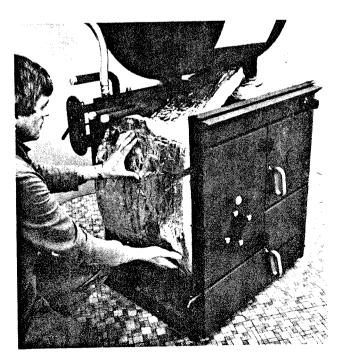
Place insulation (sheet 2) on the left hand side of Boiler.
